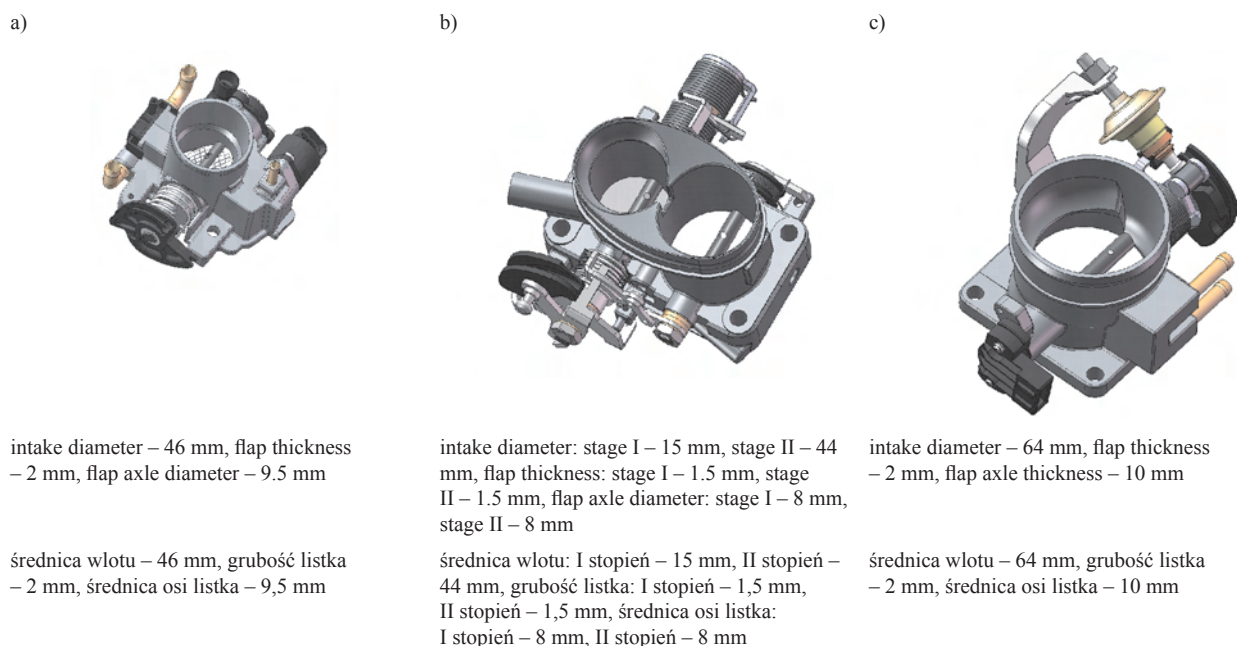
Throttle bodies investigated: a – classic, b – two-stage, c – with a profiled intake
